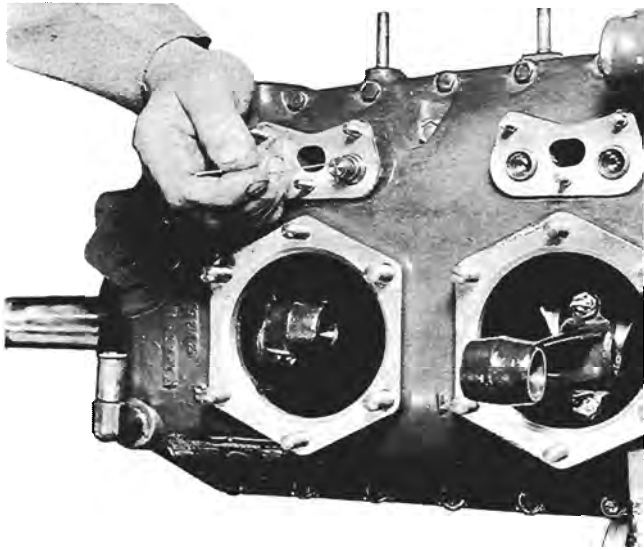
Removal of Hydraulic Unit from Valve Lifter Body.
